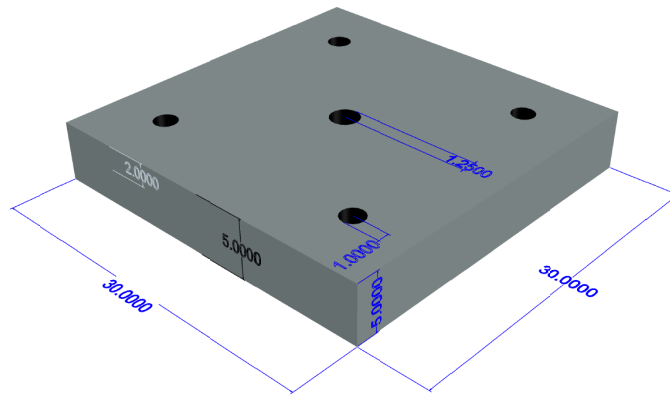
3D AutoCAD drawing of the headplate used for repeated MMF imaging.
